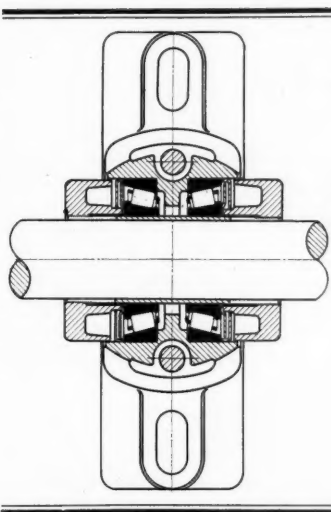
Method of Mounting Pillow Block Shaft Bearings
